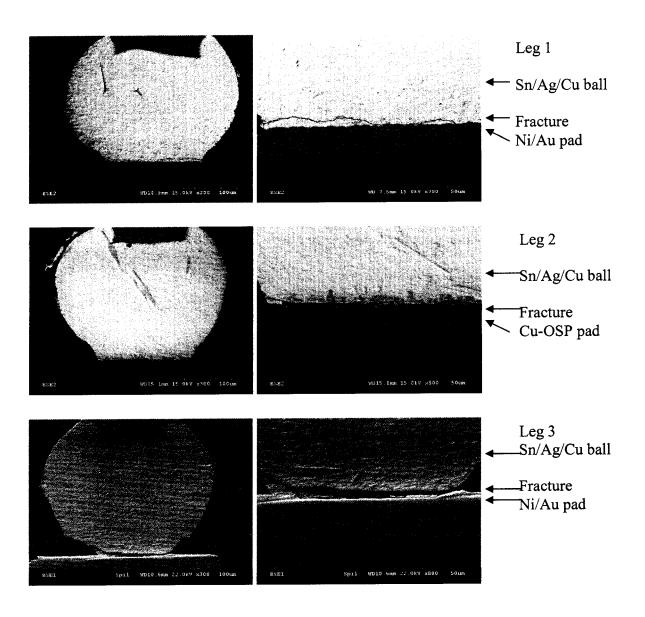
Cross-sections of failed solder balls after 80% cumulative failure test on zero-hour boards, face-up, Legs 1-3.
